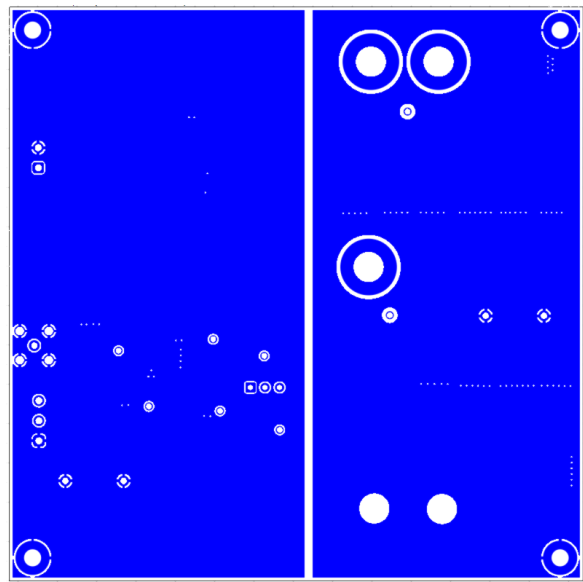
FAD1101 EVB PCB Internal Plane 2 Drawing
